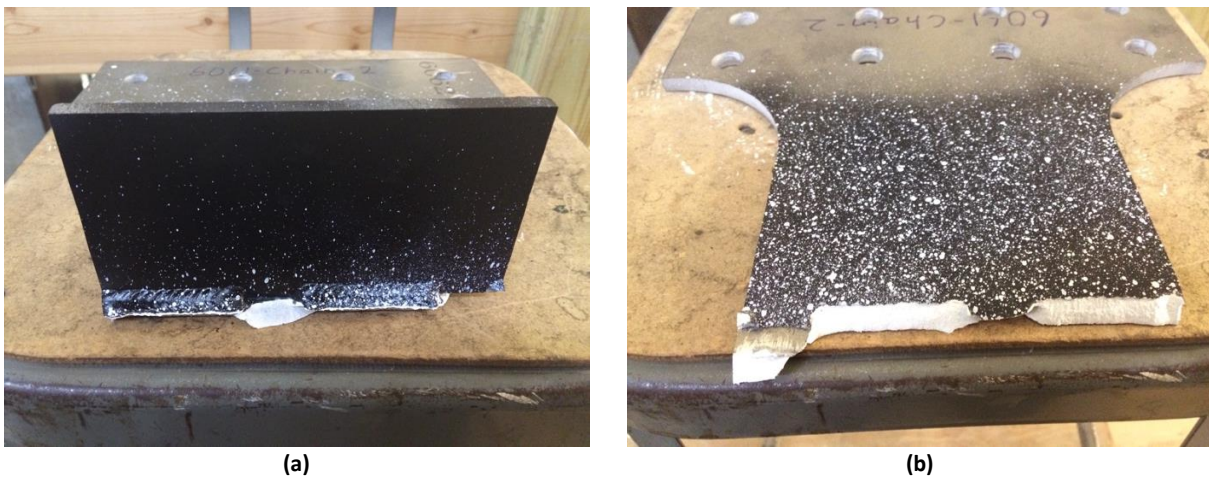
Specimen E2 Showing Failure at the Weld Toe
